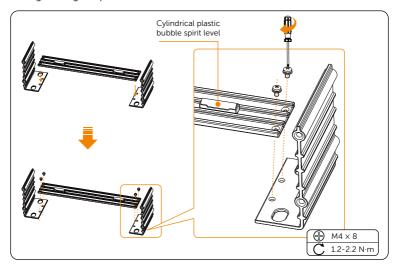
Securing I-shaped wall brackets and transverse plate
